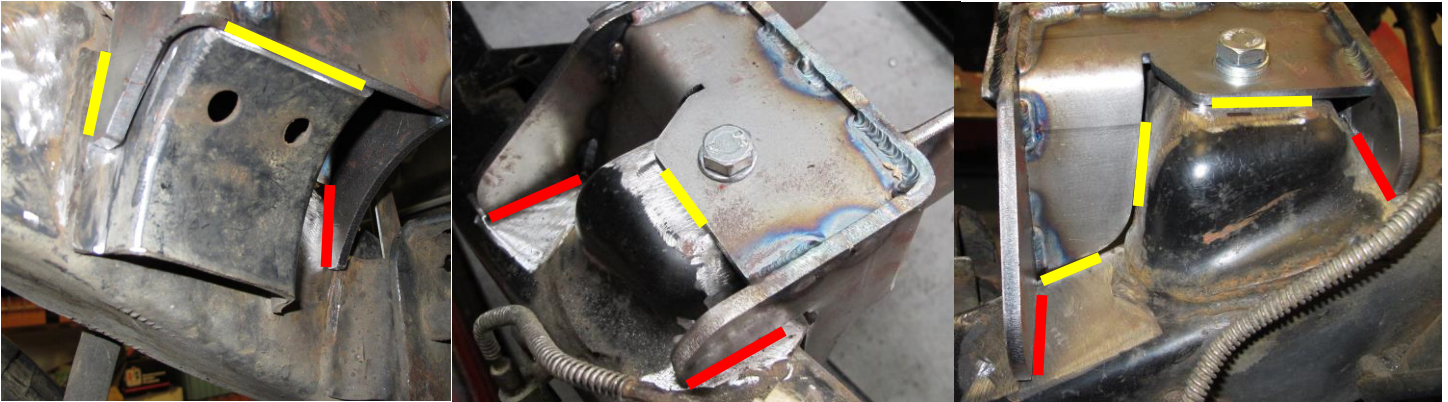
minimum weld locations for the passenger's side engine mounting bracket
